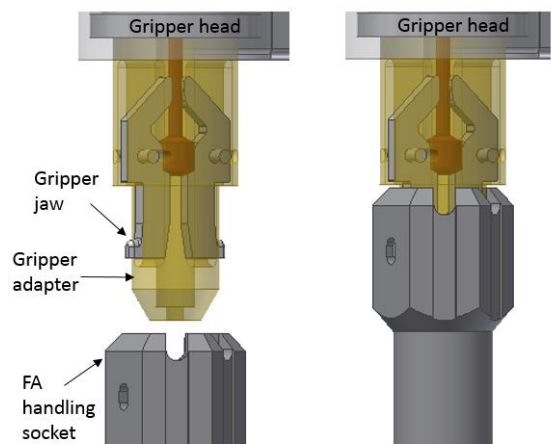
FA gripper in a disengaged view (left), and FA engaged in the gripper (right)
